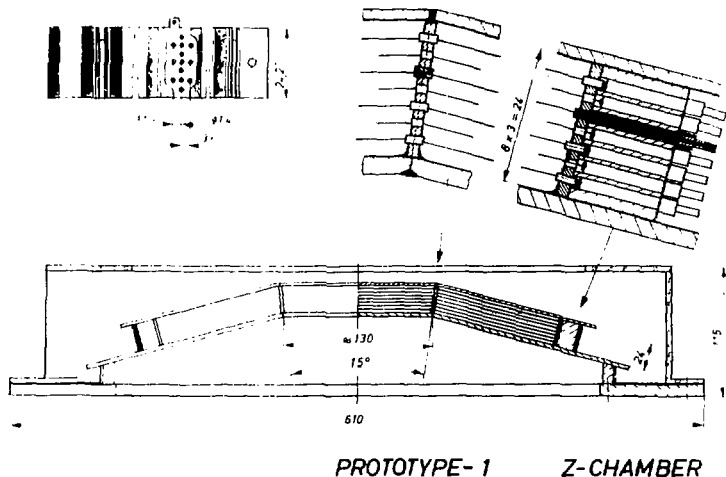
Prototype P1 Chamber, Drawing of Support Rods .
